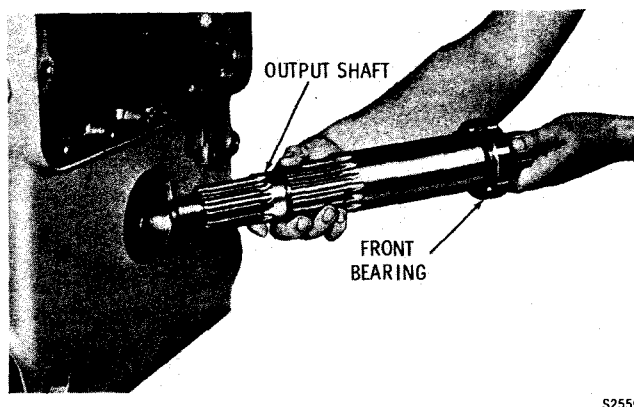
Removing output shaft (-1 models with one-piece output shaft)
